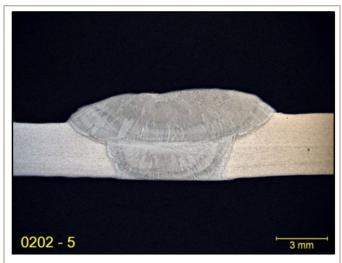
Macrograph from the semi-automatic butt-joint weld produced at Vigor Industrial in the 1G-R position
